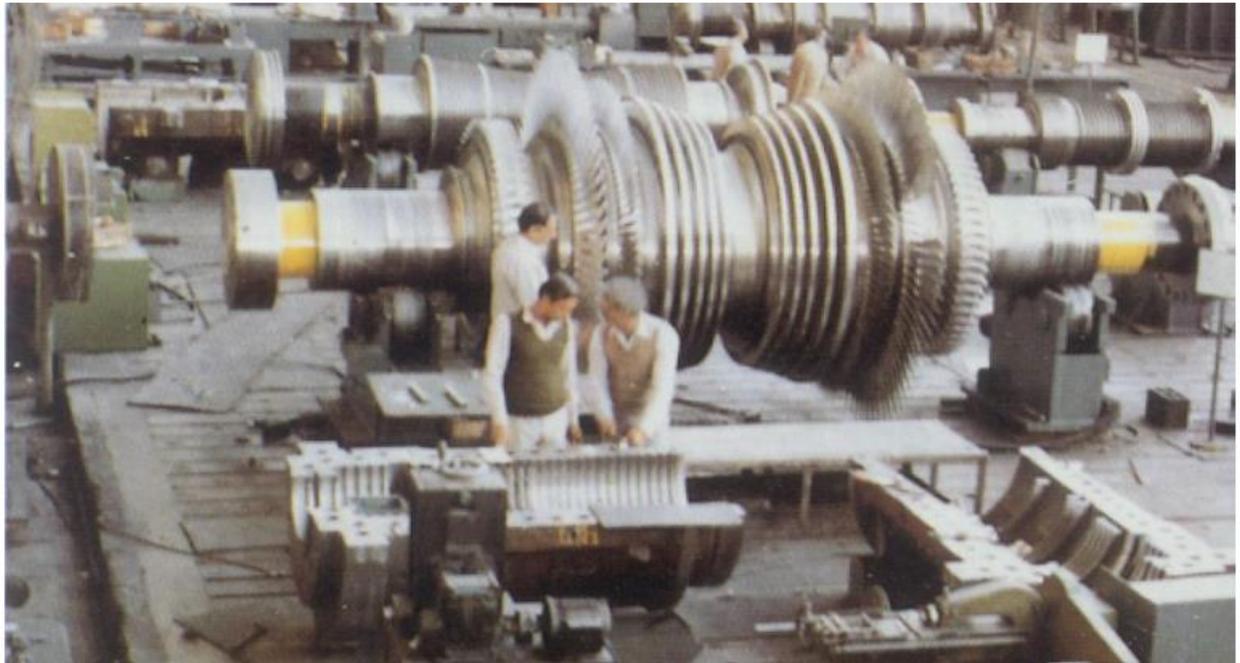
STEAM TURBINE CASING AND ROTORS IN ASSEMBLY AREA
